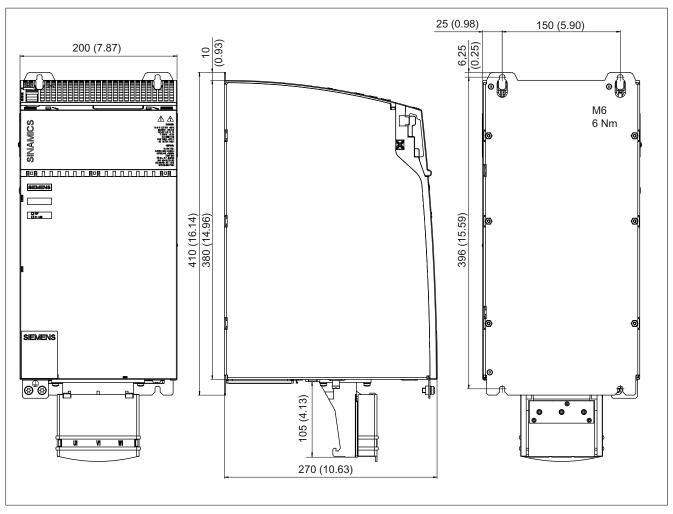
Dimension drawing of 100 kW Basic Line Module with internal air cooling, all dimensions in mm and (inches)
